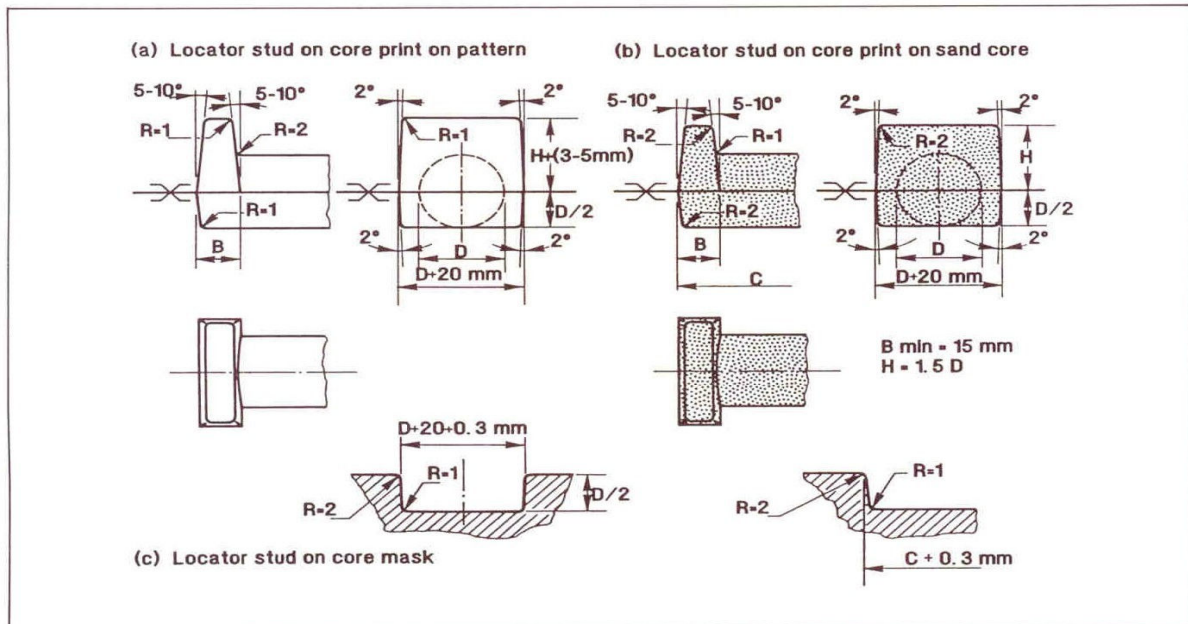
Dimensional tolerances for locators applied in a case where the core requires higher stability in the core setter mask. On this sketch, the clamping surfaces are crush-fitted and the supporting surfaces are size-to-size. For heavier cores, the opposite fit system may be applied.
